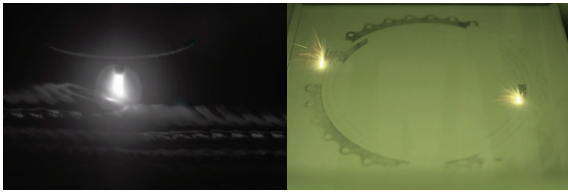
Deposition views of metal 3D prints: Stargate (left), Direct-to-metal Laser Sintering (DMLS) (right).
